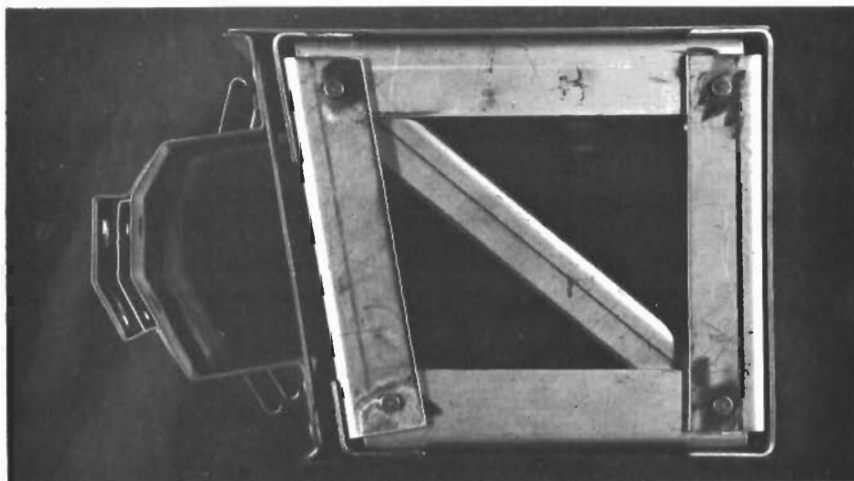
3.0-INCH RADIUS LEADING EDGE METAL STRUCTURE
